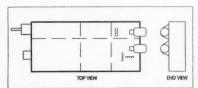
(a). Soldering two phono connectors to the top edge of the tuner's case. The end view shows jumper wires soldered over the connector's mounting to increase the mechanical support.
